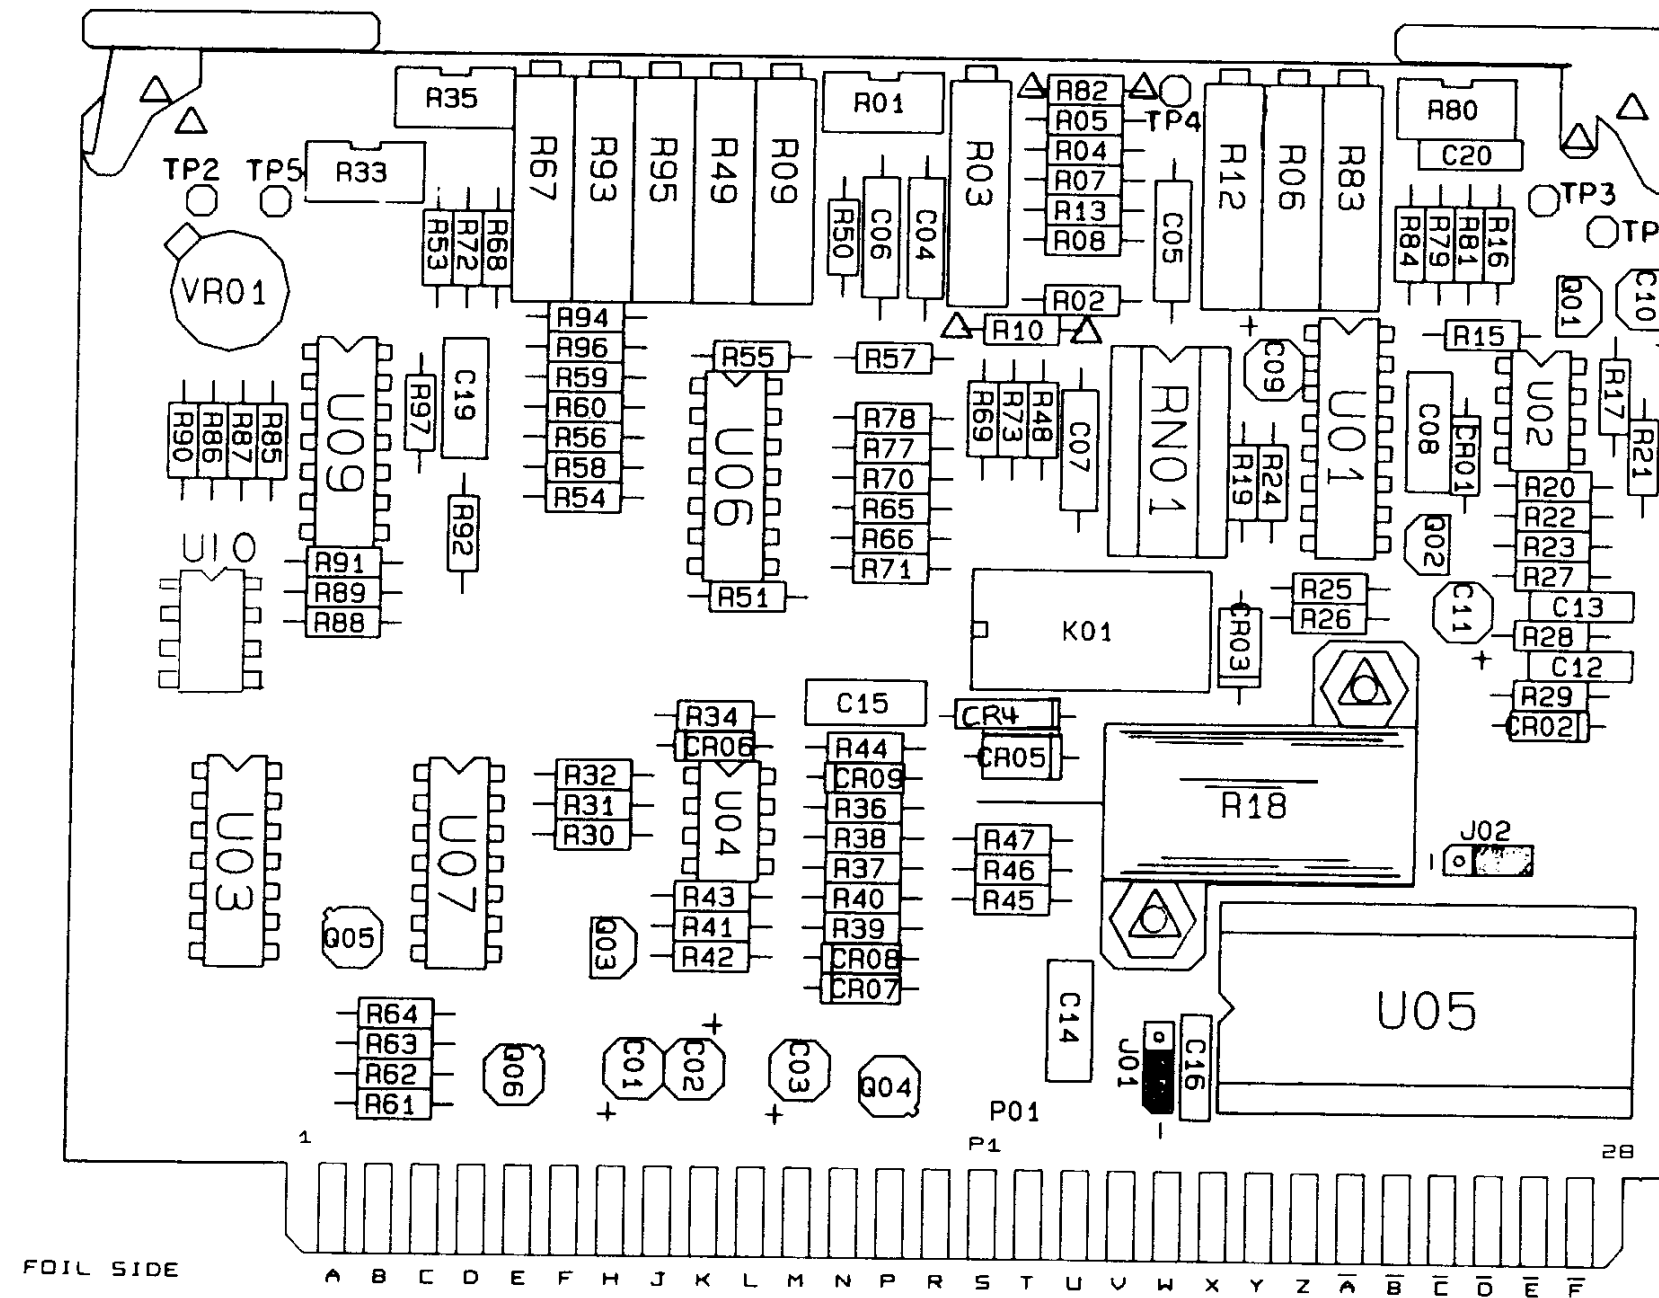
A1A6 YIG Driver PCB Parts Locator Diagram, Assy D32106-3
